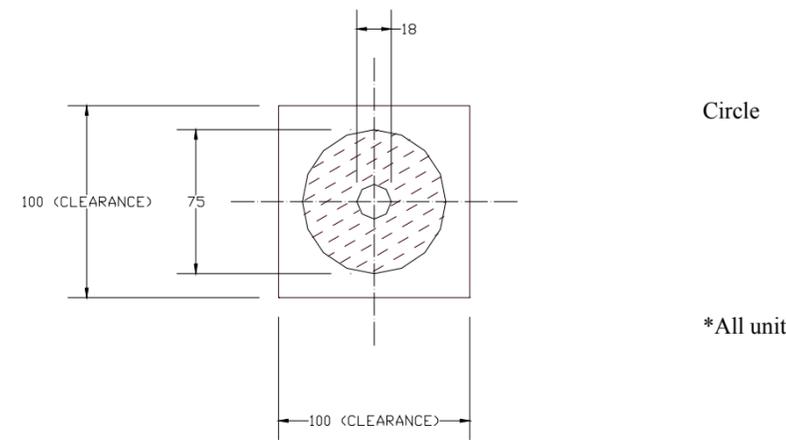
SSD1306Z2 alignment mark dimensions
